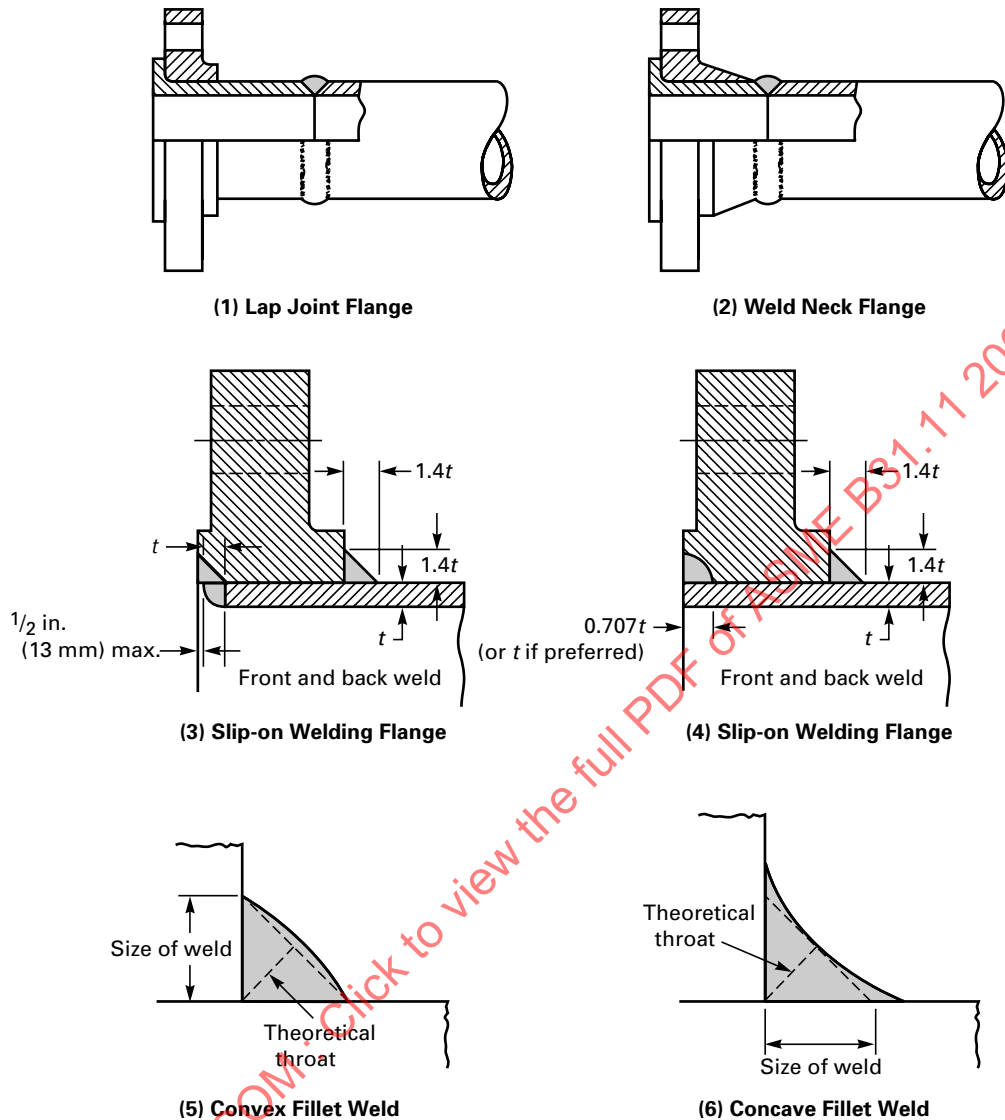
(b) Recommended Attachment Details of Flanges
